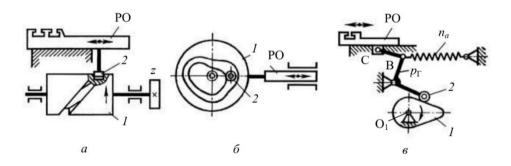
Kinematic schemes of roller mechanisms used in metal cutting machines.
